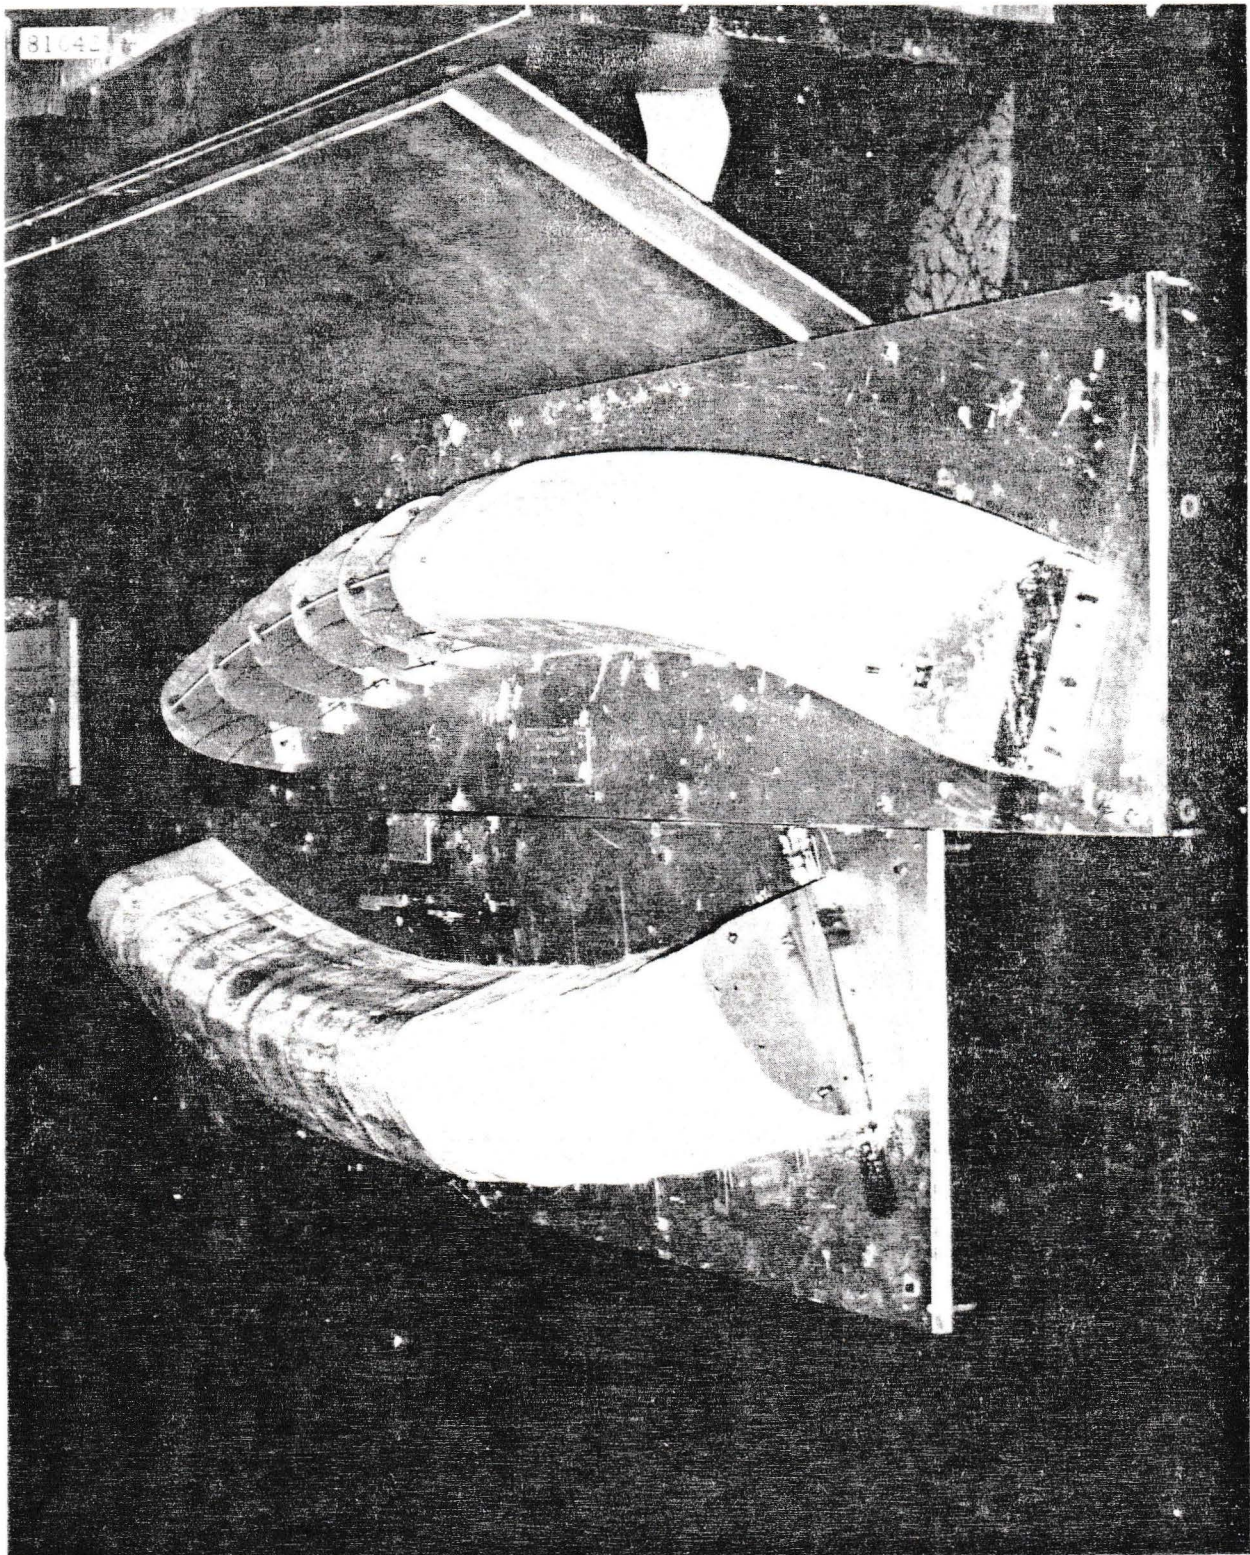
FORM TOOL PATTERNS FOR OUTER WING TIP SKINS
